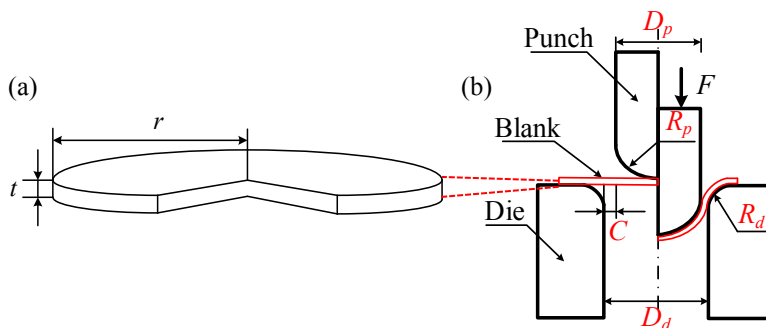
(a) Schematic of testpieces and (b) Tooling sets in micro deep drawing process.
